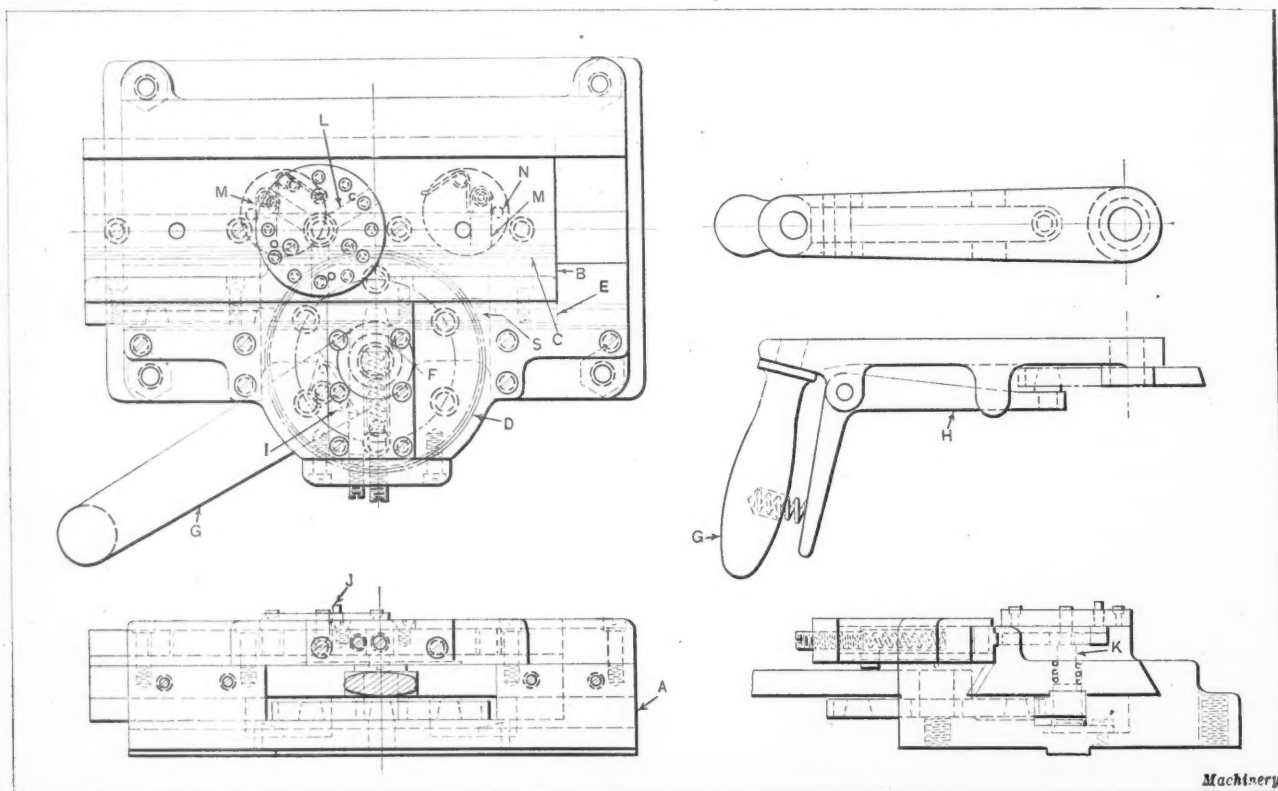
Fixture used in performing Multiple Tapping Operations on the Lower Plate of a Meter
